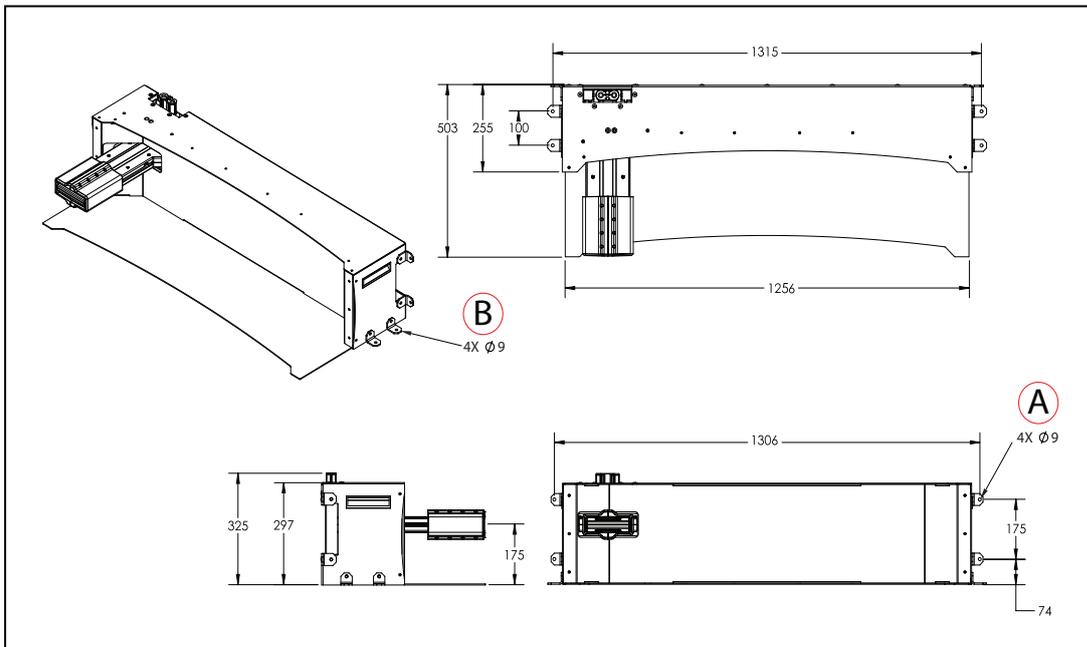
Docking Target Dimensions, (A) Wall Mount Brackets, and (B) Floor Mount Brackets
